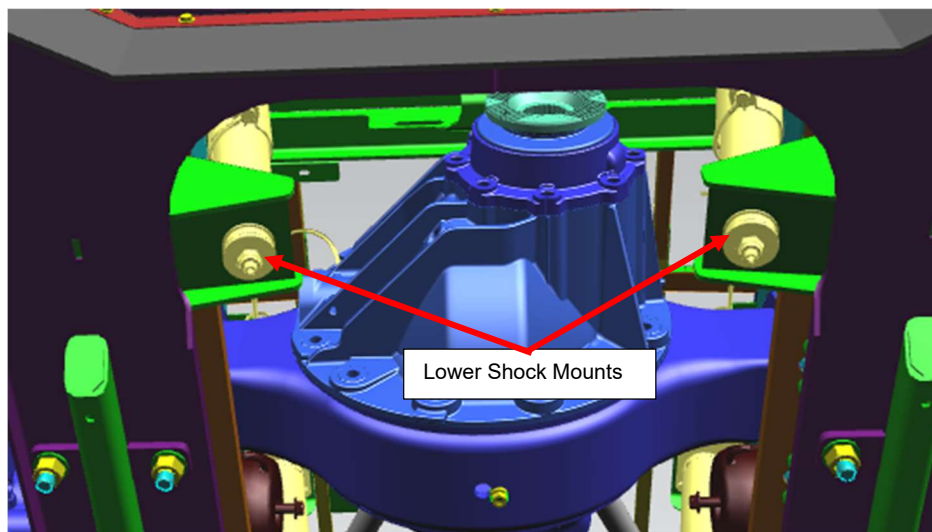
Rear Shock absorbers lower hardware (drive shaft removed for clarity).
